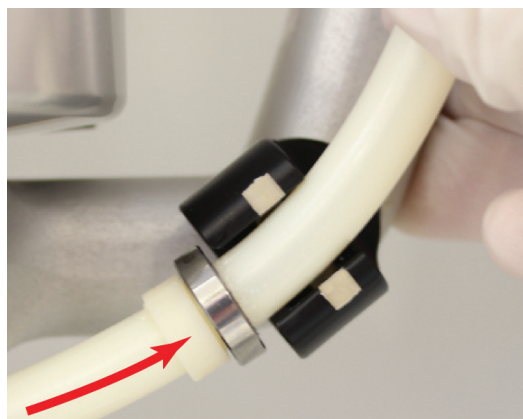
Lower Drive Tube Bearing inserted into the Lower Bearing Retainer
